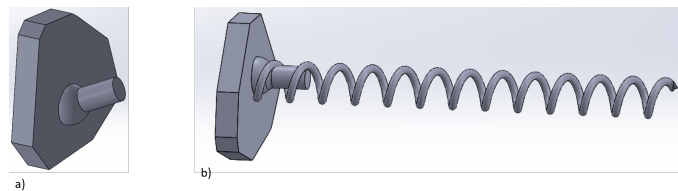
3D modeling of the mechanism that pushes the suturing elements with rotary joint. Side view. a) Piece 3 with rotary joint. b) Piece 3 with rotary joint and spring.
